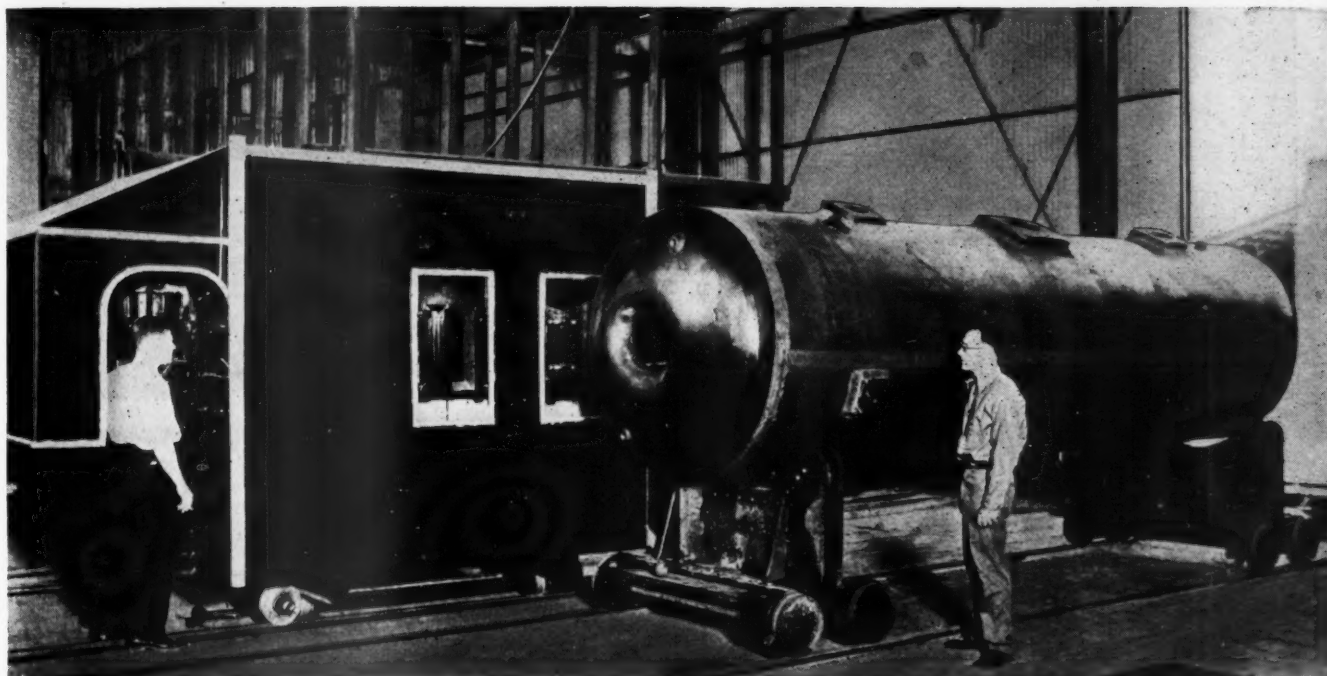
Exterior view of X-ray car with welded drum in position for radiography.
